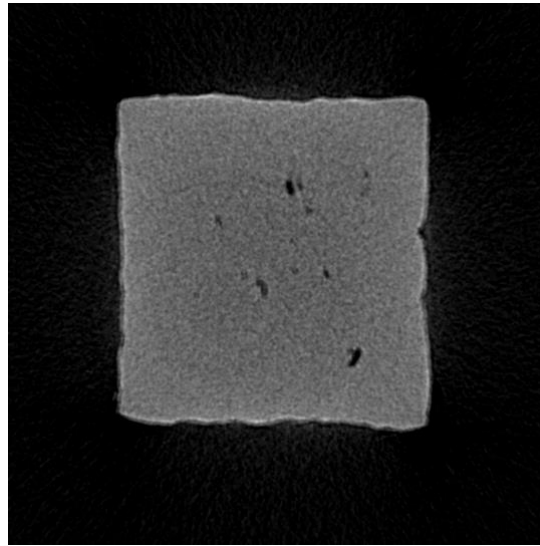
Reconstructed cross section of a deformed tensile specimen. Tensile axis is out of the page.
